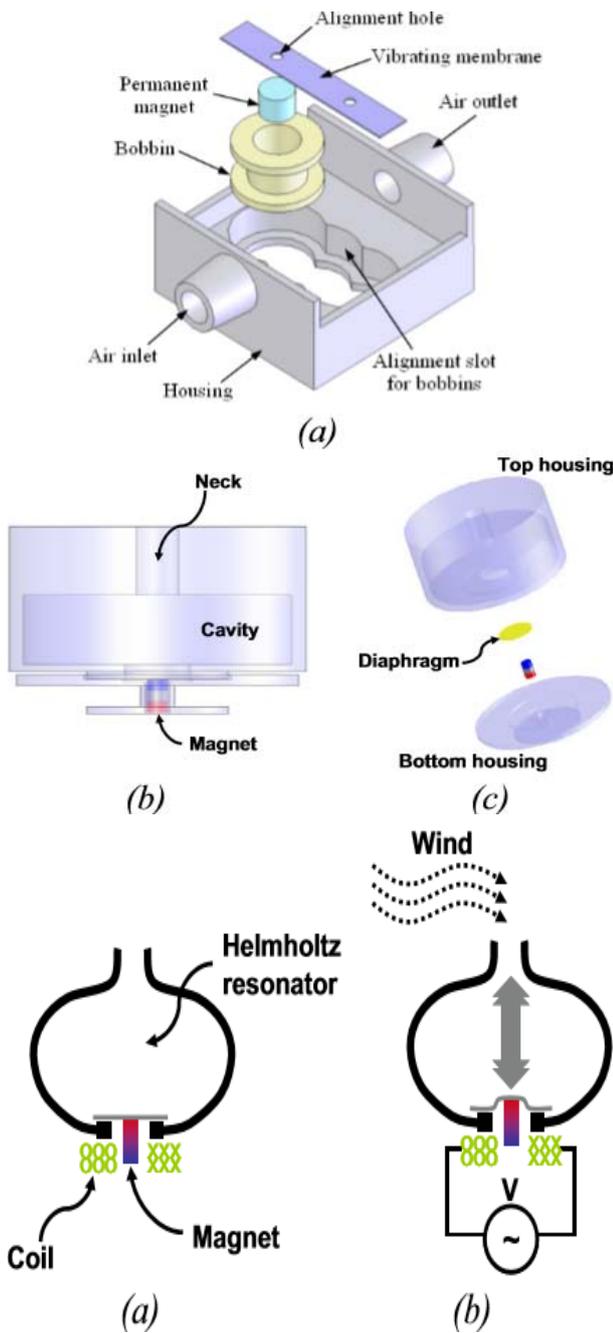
Top : 3-dimensional schematics of the proposed energy scavengers; (a) exploded view of the windbelted micro-generator, (b) cross-sectional view and (c) exploded view of the Helmholtz resonator based micro-generator.
